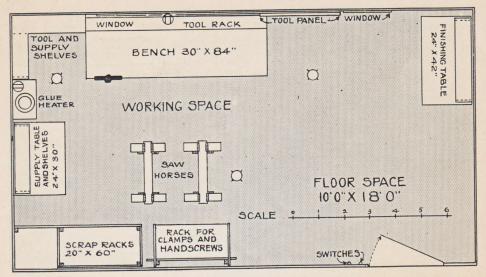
Plan of shop for the more experienced worker. Tool panels, finishing table, supply shelves, scrap racks, glue heater, etc., have been added to the beginners workshop
